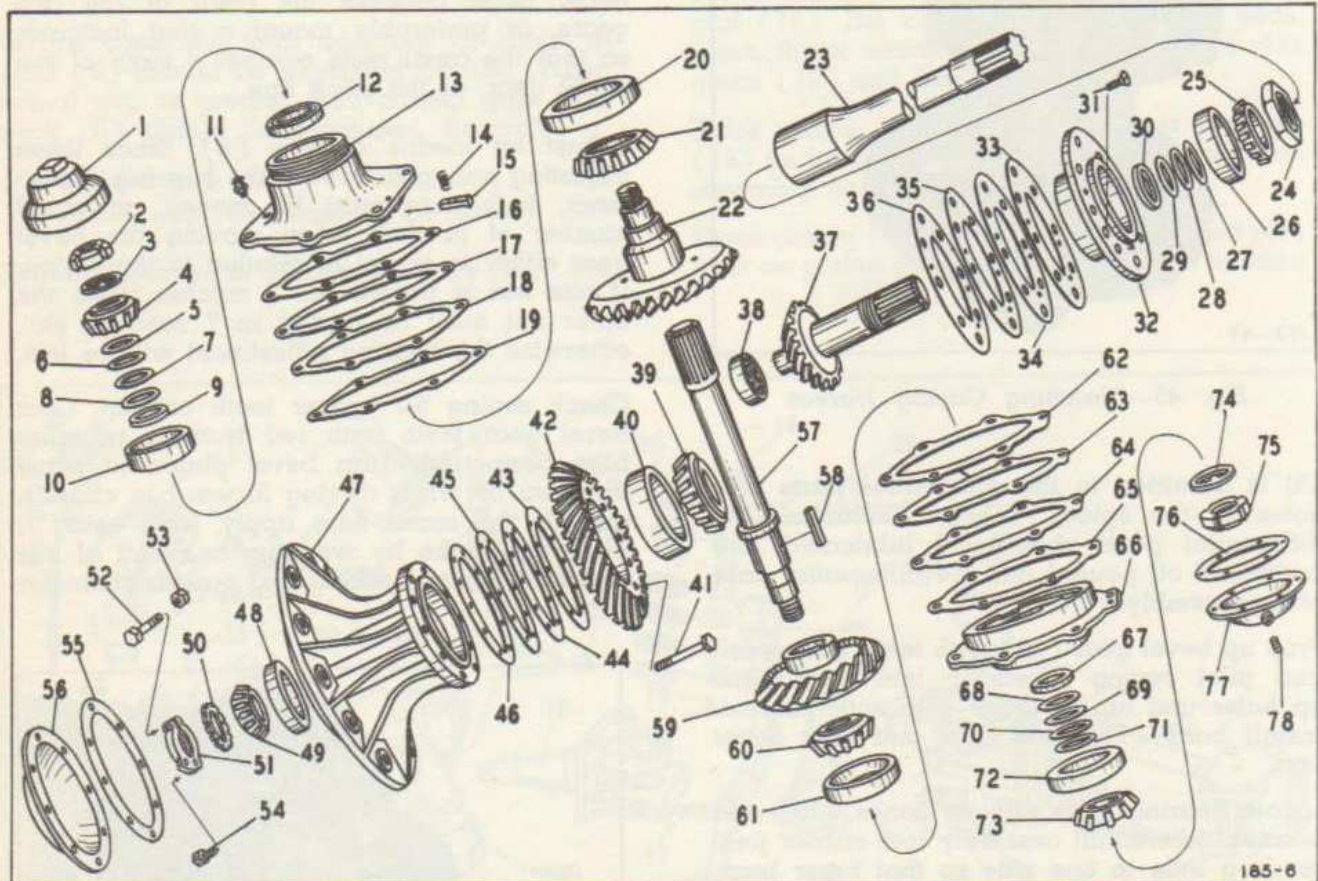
Exploded View of Gears, Shafts, Bearings and Parts of Wheel Drive Unit
